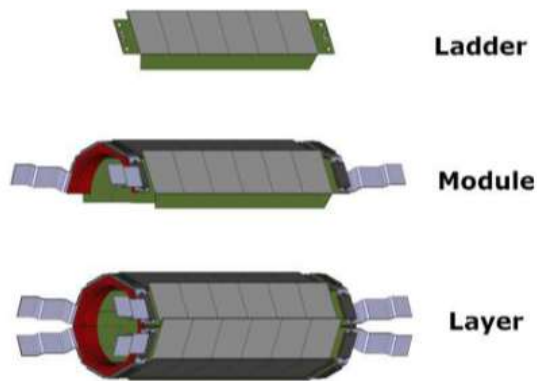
Tracker Layer 1 assembly built up from ladders over modules to layers.[13]
